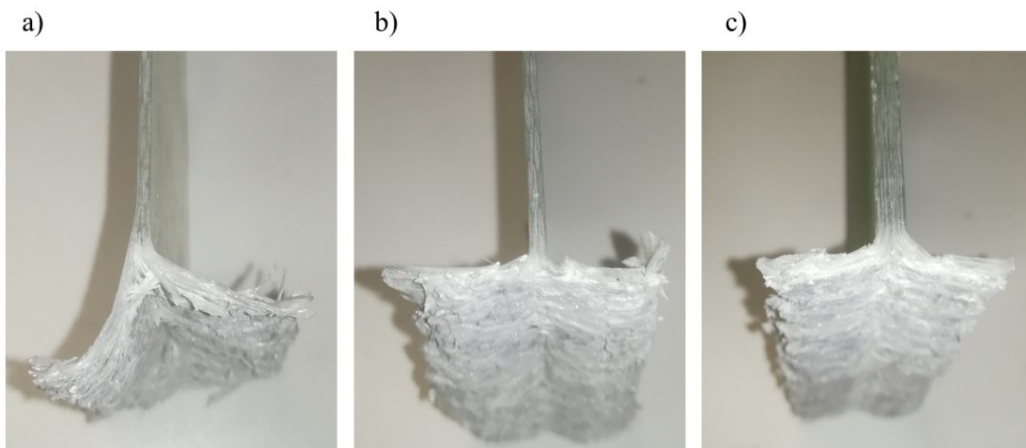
Failure mode of VV770 glass/epoxy specimens after splaying test: a) 3 layers specimen, b) 4 layers specimen, c) 8 layers specimen.
